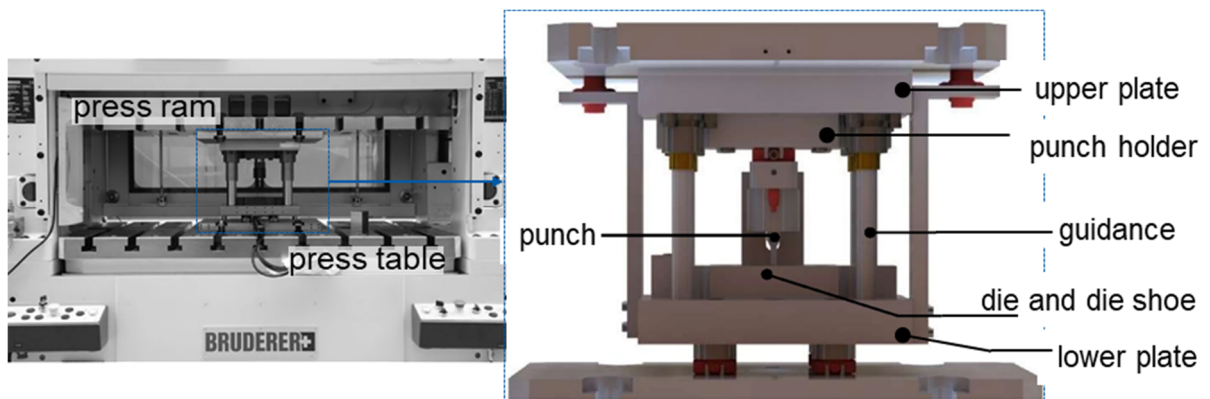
Blanking tool setup in a BSTA 810 stamping press according to [MOL22].
